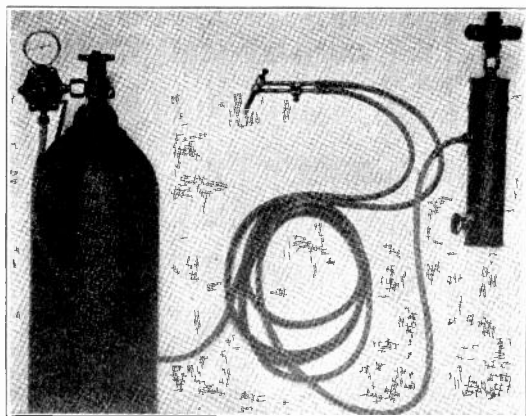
This view shows the method of connecting a lead burning torch to the gas cylinder and piping, and also shows the mounting of the pressure regulating valve on the gas cylinder.
